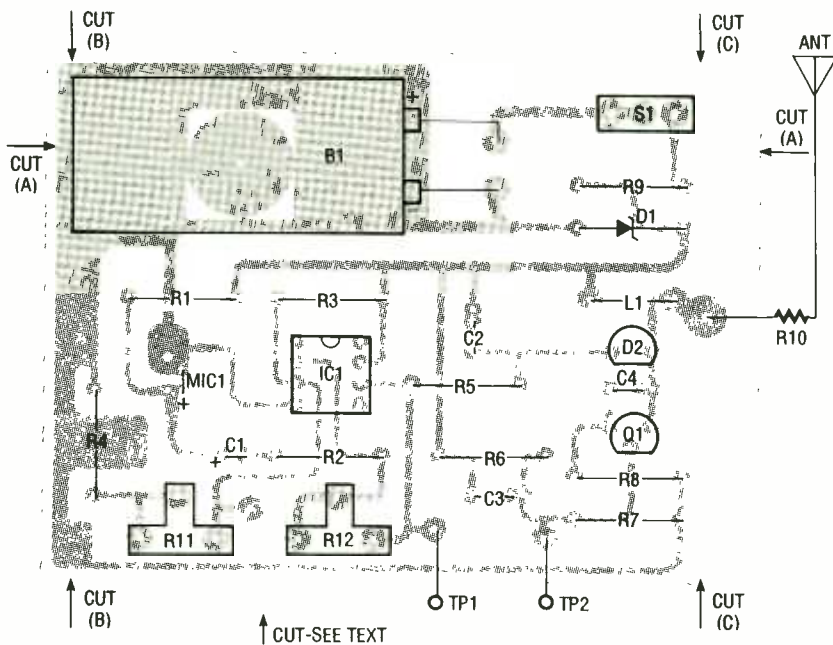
PARTS-PLACEMENT DIAGRAM. There is room on the board for the 9-volt battery holder if you are installing the board in a large enough case.
